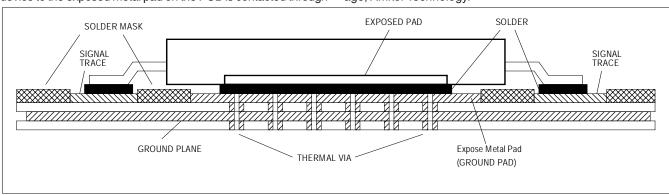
P.C. BOARD FOR EXPOSED PAD THERMAL RELEASE PATH EXAMPLE
